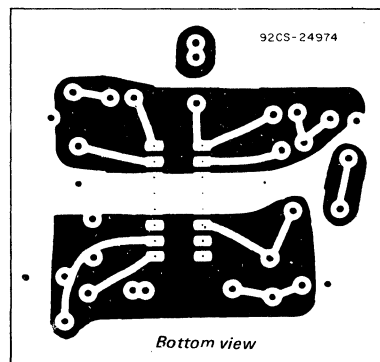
Printed-circuit board (actual size) containing the test circuit, shown in Fig. 3, for the CA3131EM.
